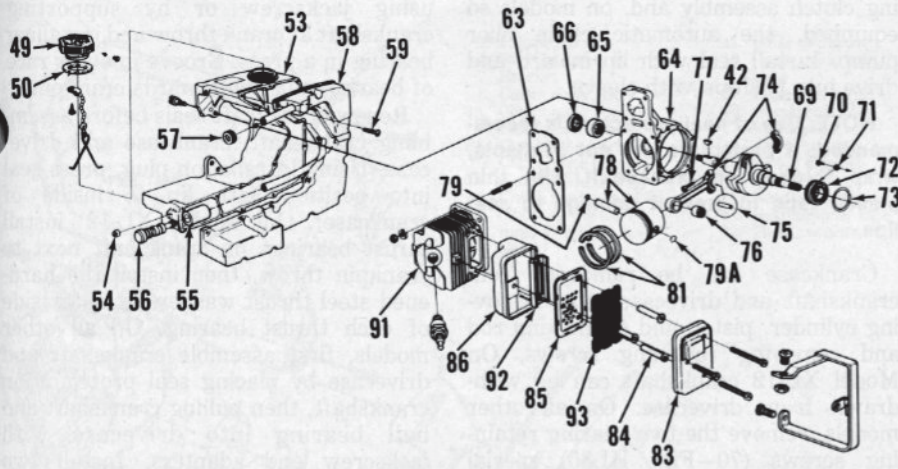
Exploded view showing latest type fuel tank and later construction of power head; refer to Fig. HL34 for early units. Ball bearing (72) is retained on crankshaft by snap ring (73) and in drivecase by two screws (70) and special washers (71); refer to Fig. HL36. Latest models have 31 loose needle rollers (75) at crankpin; earlier models have 28 rollers. Tank cover (58) is sealed to tank (53) with cement (Homelite part No. 22788) and is retained with 16 screws (59). Later tanks are permanently bonded.
